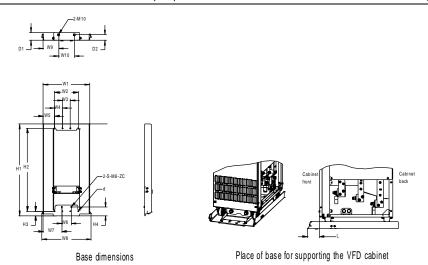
380V 220-500kW VFD base bracket dimensions and mounting dimensions
